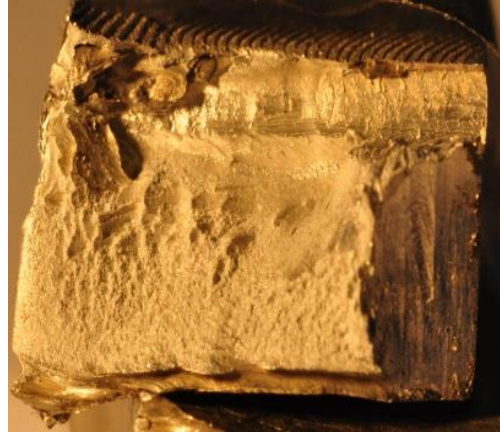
₂. Macrophoto. fracture (600rpm,150mm/min)
